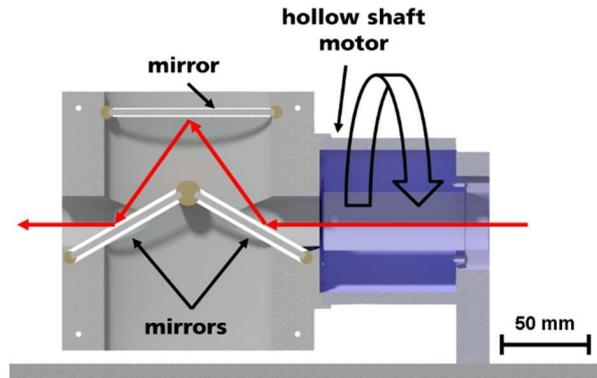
Half section of the mechanical design for the Abbe-König prism. The prism is held and rotated via a hollow shaft motor.
